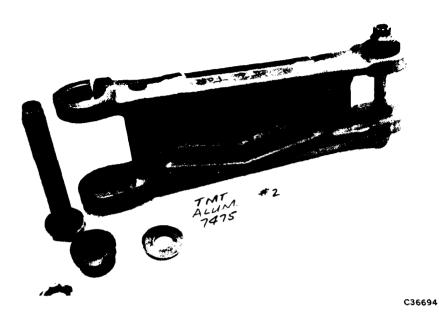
Failure Mode Exhibited by Drive Scissors Arm Assembly, Fatigue Test Specimen Number 2 of 7475-T73 ITMT Material
